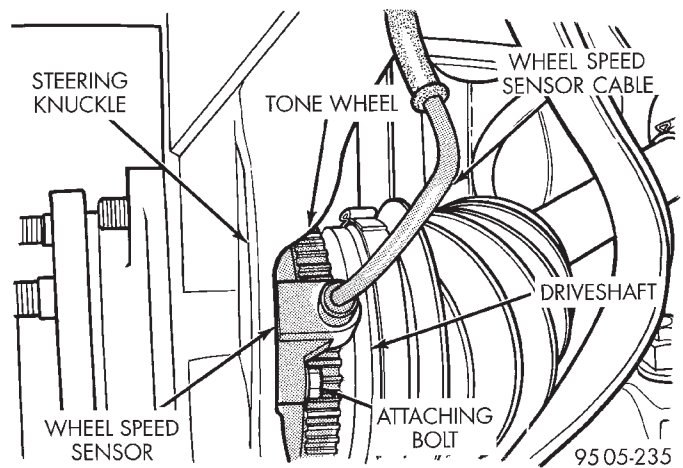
Front Wheel Speed Sensor And Tone Wheel
